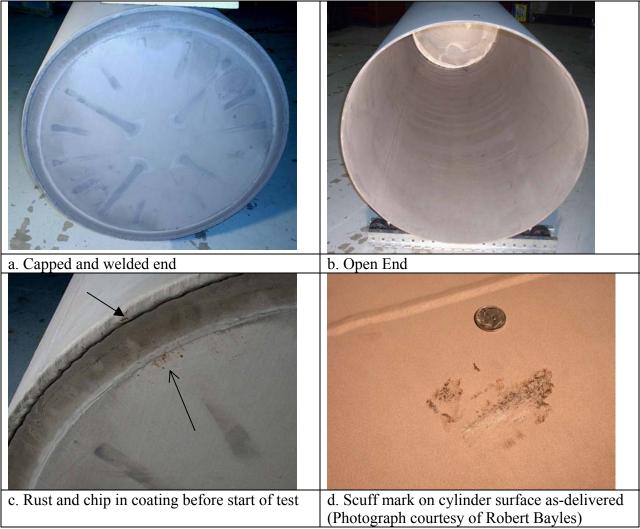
Additional Photographs of Cylinder in As-received Condition.
